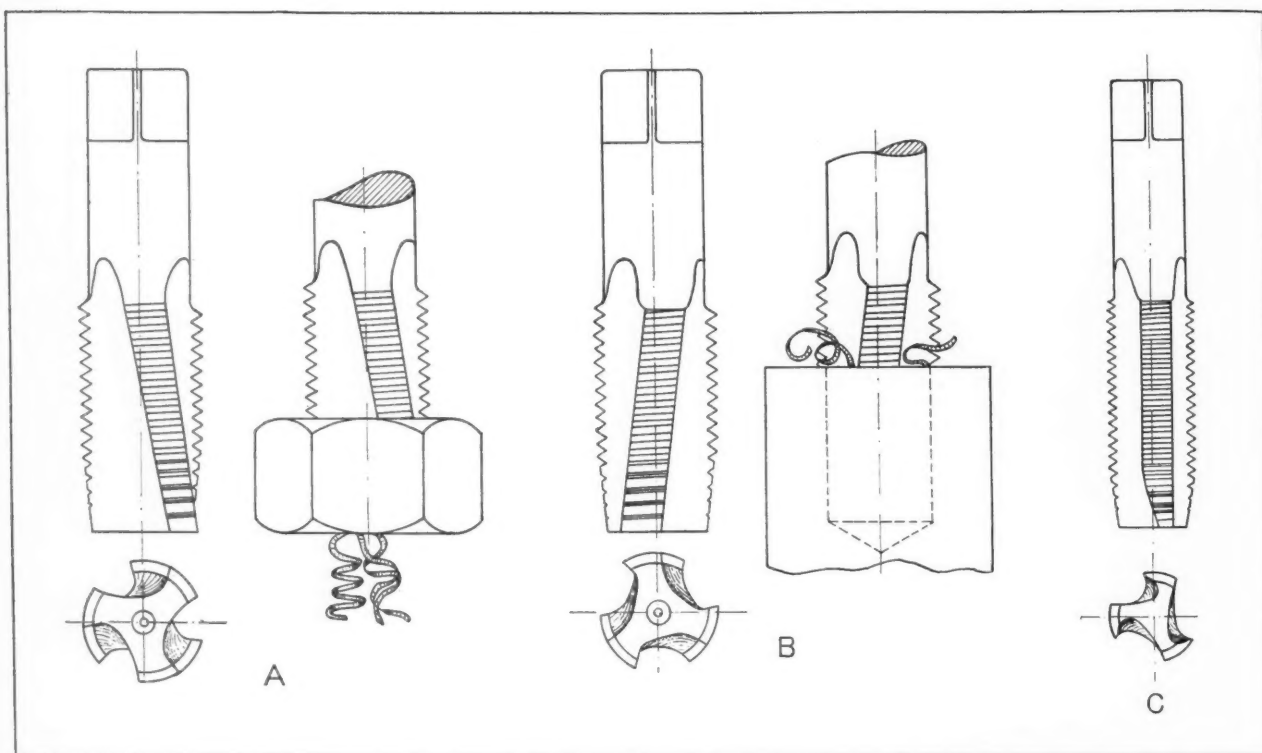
Special Taps for Threading Through and Bottoming Holes
